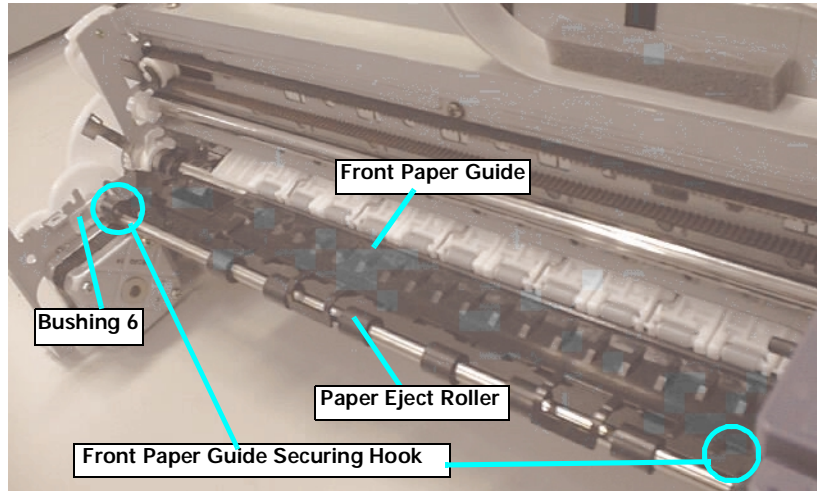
Front Paper Guide and Paper Eject Roller Removal
